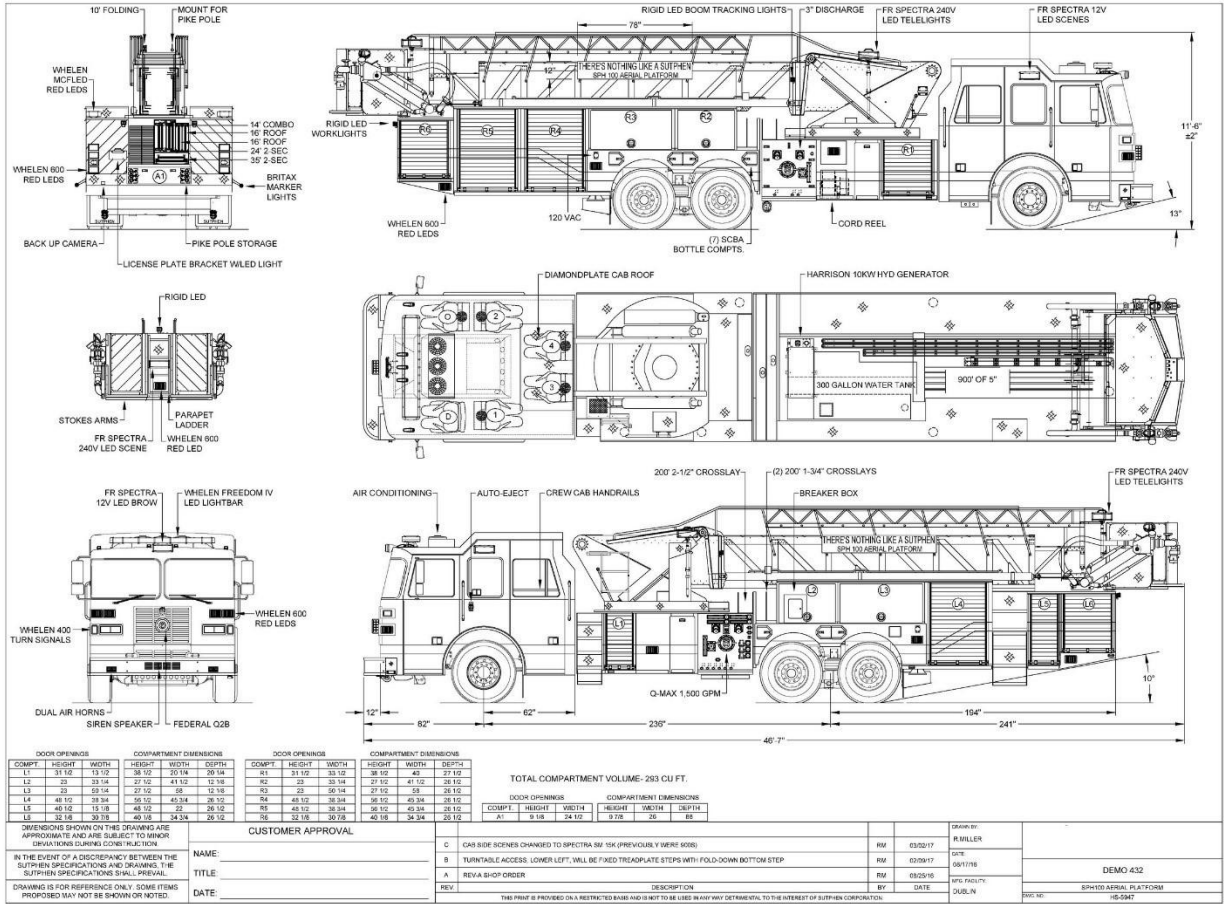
Technical Drawing of Tiller Truck with Rear-Mounted Basket
